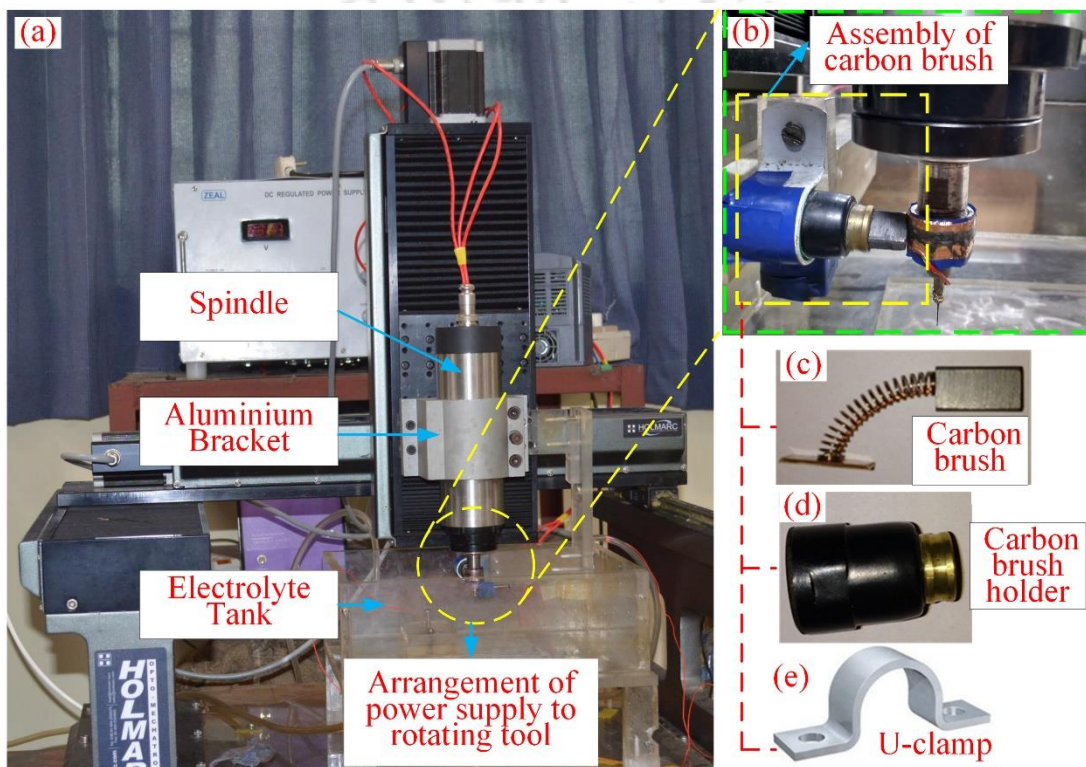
Assembly of spindle with z-axis for tool rotation
